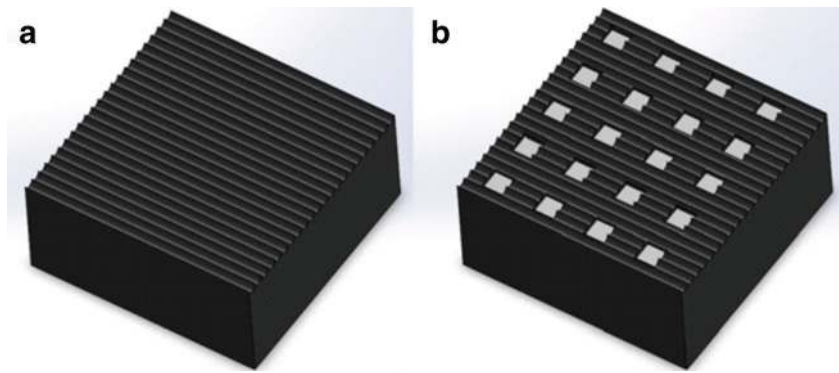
Specimens used for testing the surface roughness. a 80×80 mm specimen after milling. b Subsequent state of the specimen, with 20 burnished 6×6 mm areas
